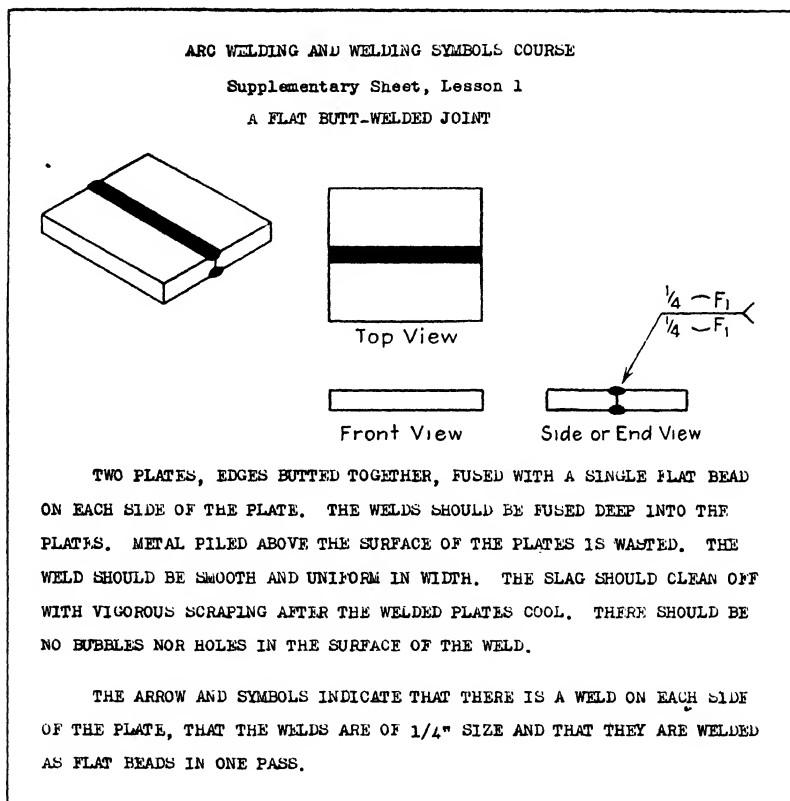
This simple weld-symbol and blueprint lesson sheet is one of a series that one large welding organization presents to welding students during their first few days of welding school practice. It is a step toward necessary theoretical knowledge needed in that particular shop. (Courtesy of R. G. LeTourneau, Inc.)
